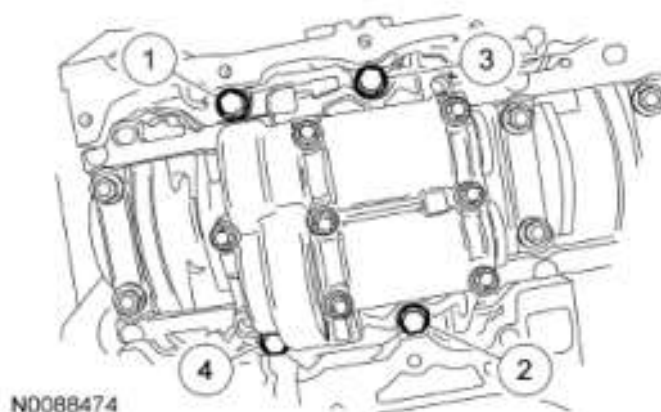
Balancer Unit Mounting Bolts Tightening Sequence
